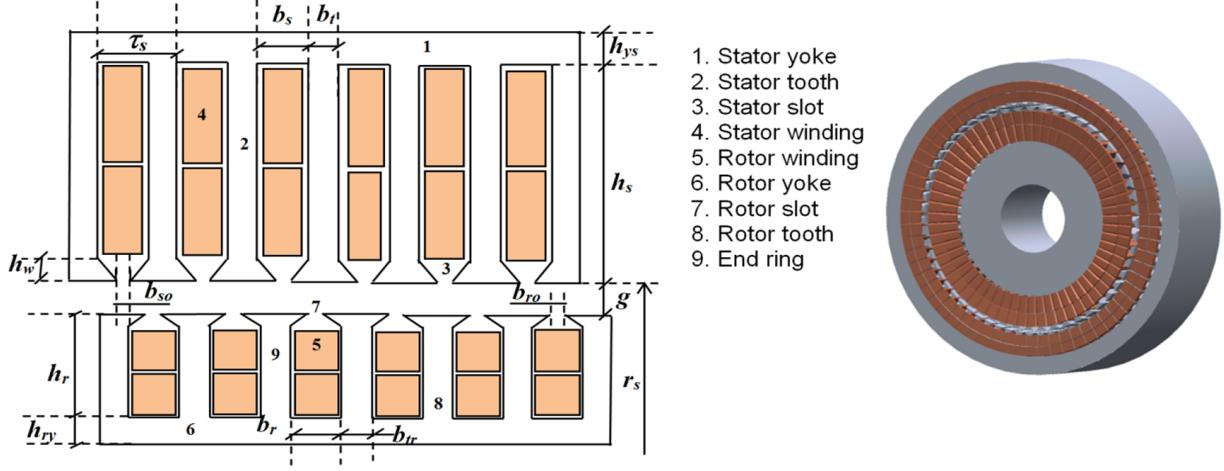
DFIG module within GeneratorSE : design dimensions and CAD illustration reproduced from [17]
